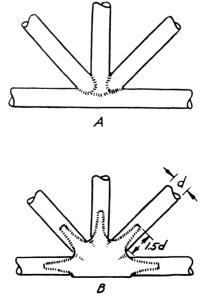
Aircraft tubing welds: A. A cluster weld, B. A repair gusset welded to an injured cluster weld
